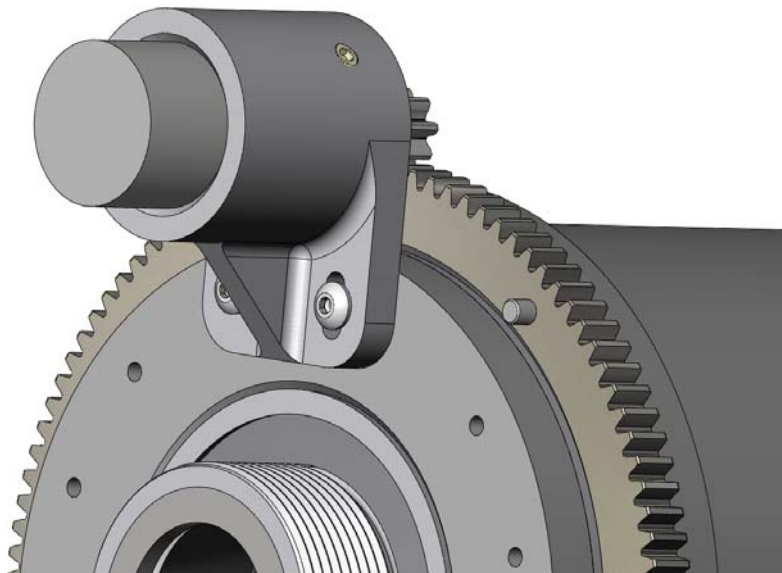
Attachment of stepper motor bracket to housing with backlash adjustment.
